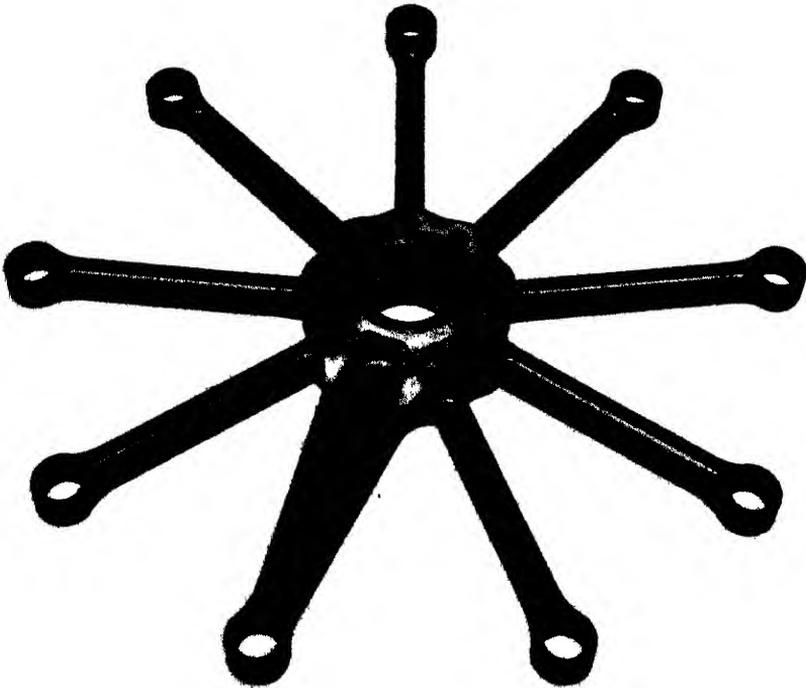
Connecting-rod Assembly of "Bristol" Pegasus
